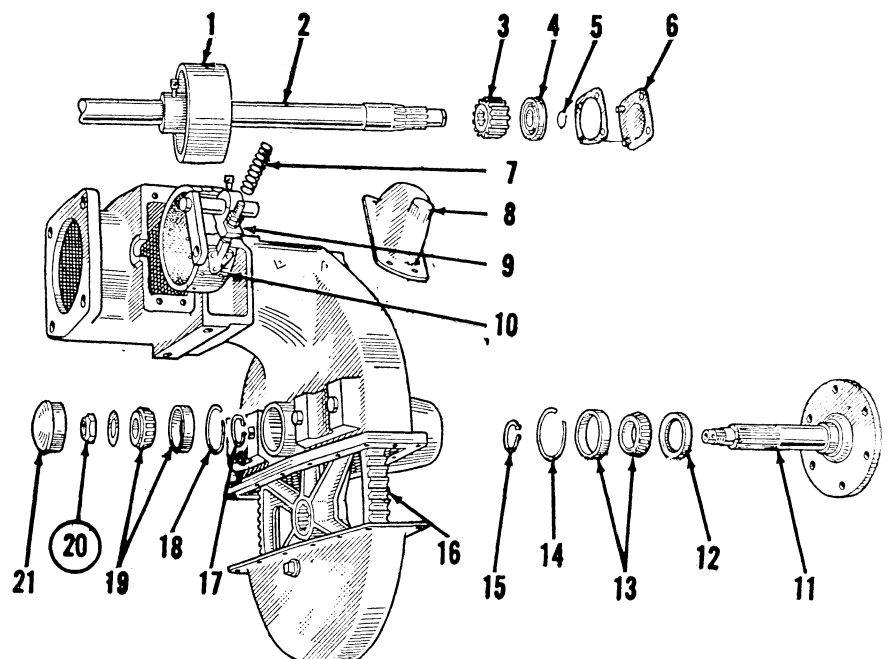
Pony final drive assembly. Wheel axle shaft bearings are adjusted by nut (20). Brake drum (1) is keyed to final drive shaft (2).
